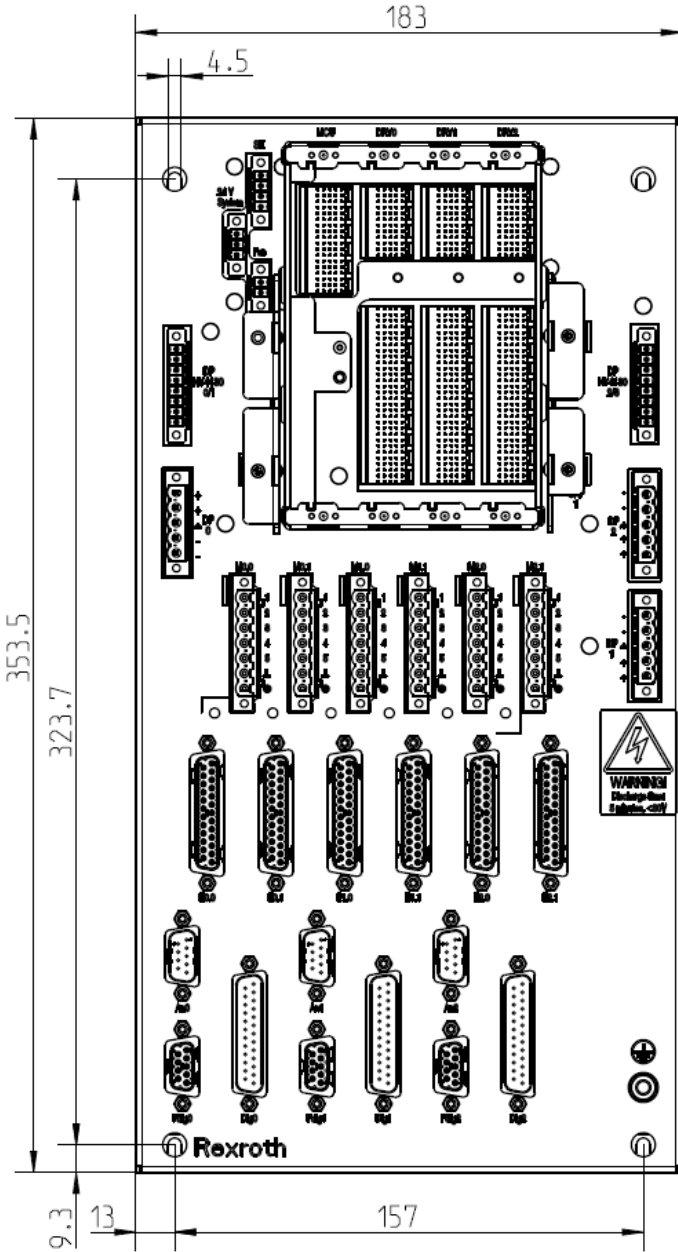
Dimensions (front view) of the NYS04.2-ST-03-ULNN-NY4033
